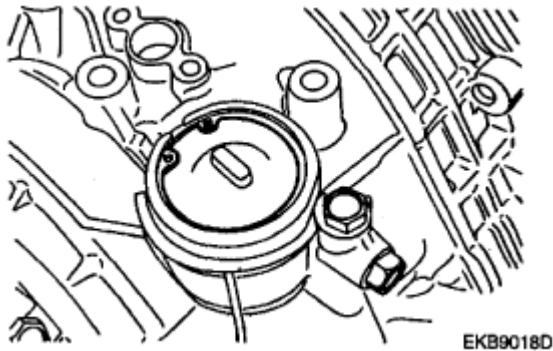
Identifying Overdrive Clutch Reaction Plate And Clutch Disc Set
